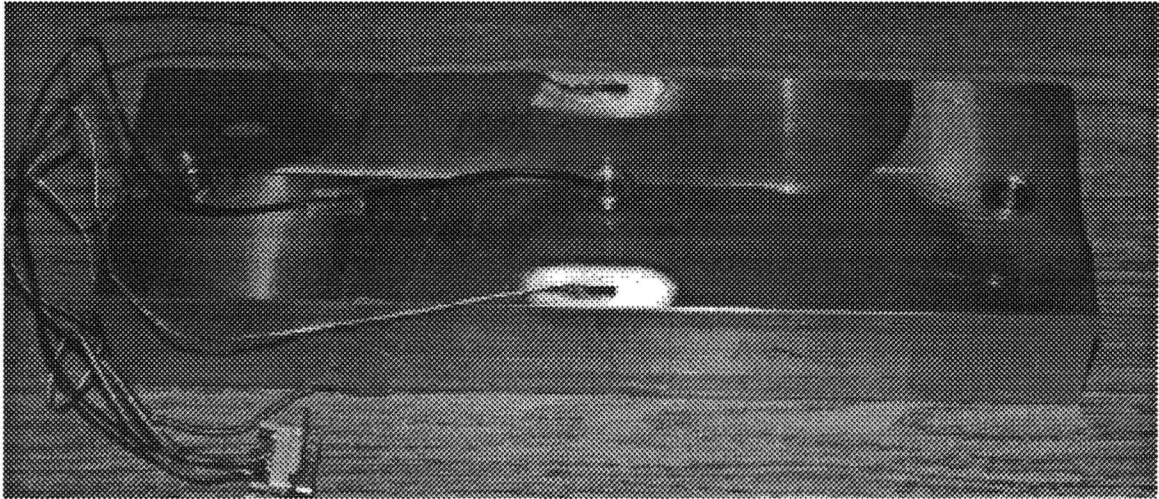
Photograph of the Ring-Hole Drilling Specimen.
